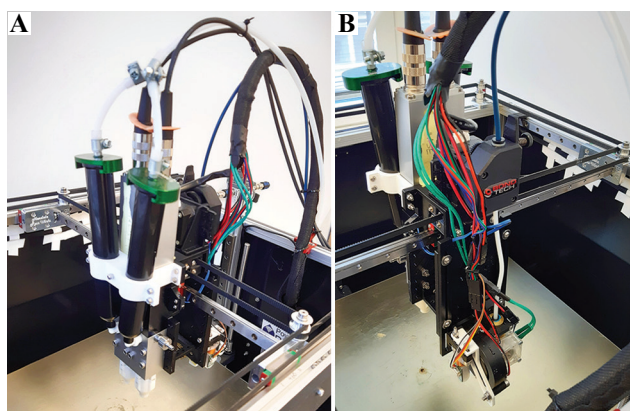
The Viscotec Vipro-HEAD 3/3 extruder with custom Luer-compatible endpieces (A), and the original E3D V6 filament extruder on the opposite side of the printhead carriage (B).
